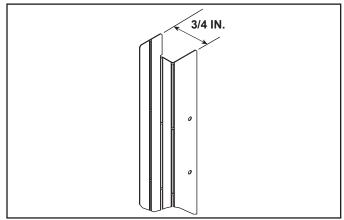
Side Finishing Template Bend - LMOD Series Doors
